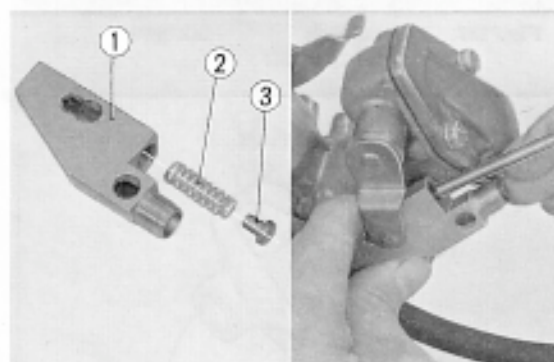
① Adjuster holder ② Coil spring B ③ Spring seat B
